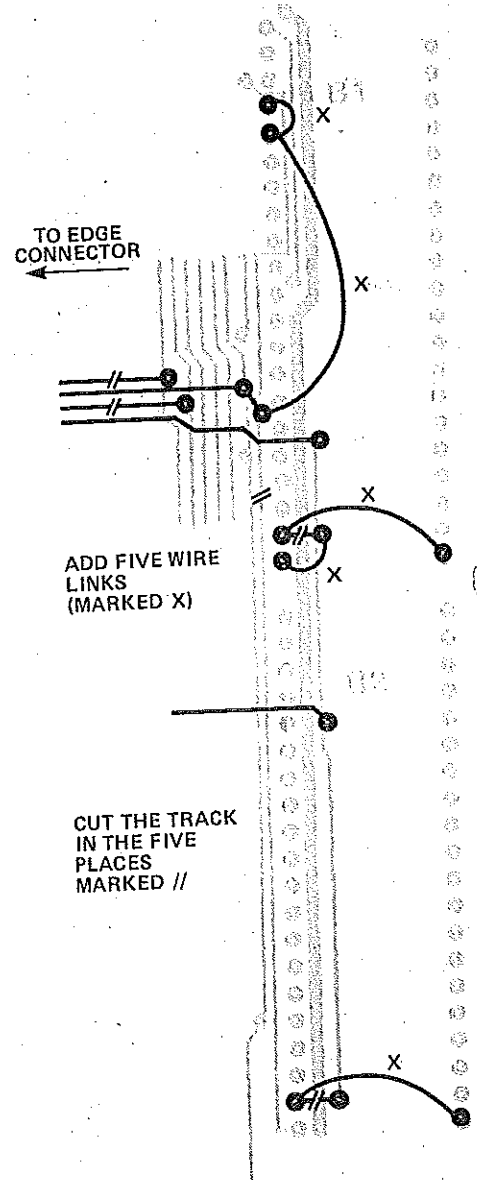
PCB modification to enable 6821s to be used in place of 6522s.
